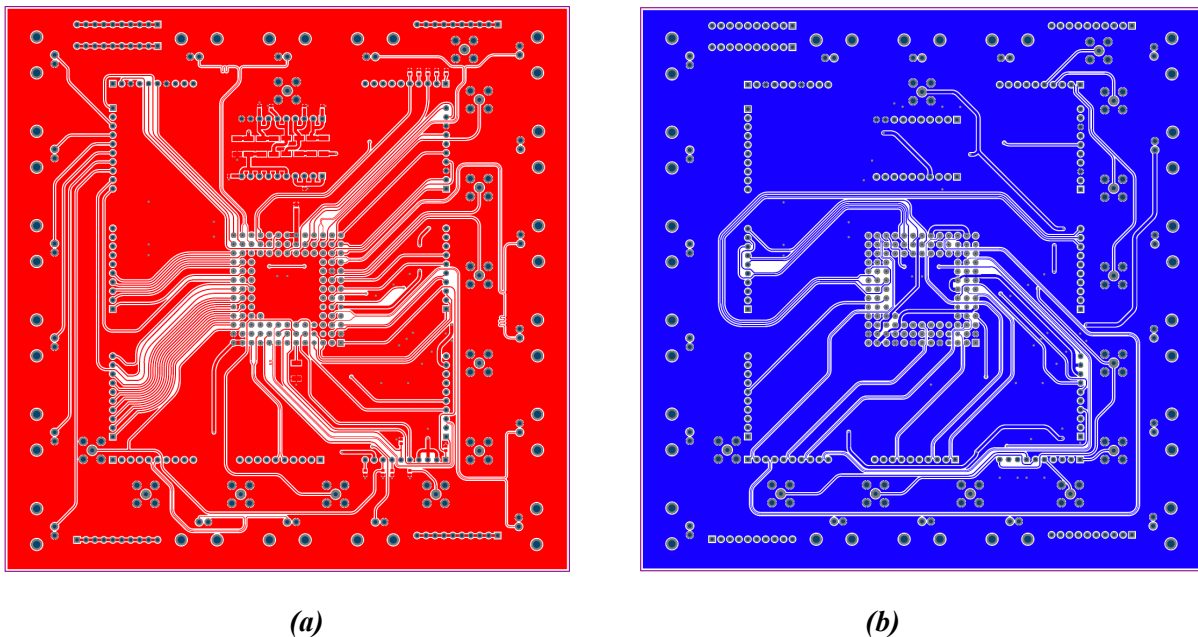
(a) Top layer of the PCB, (b) Bottom layer of the PCB.
